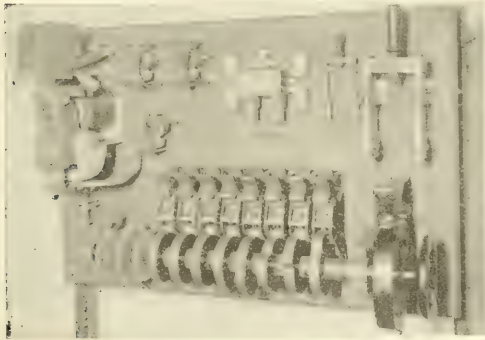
CONTROLLER FOR A COLD ROLL MILL
